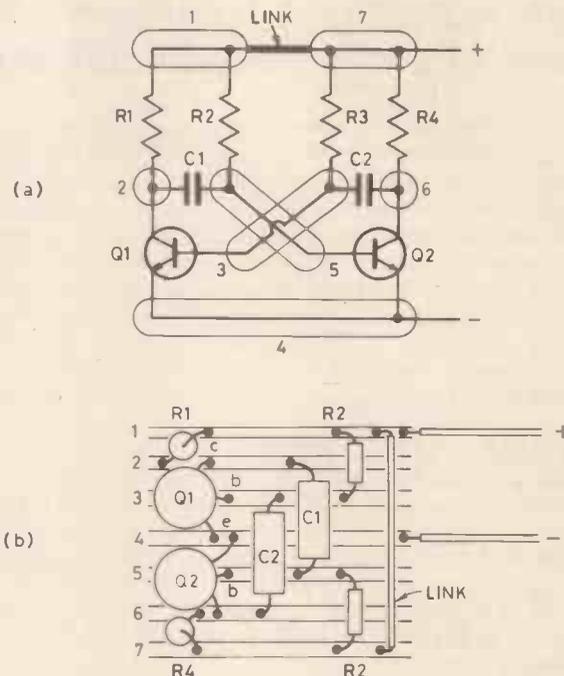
Mirror-image layouts (A) Marked-out circuit (B) Board layout.
